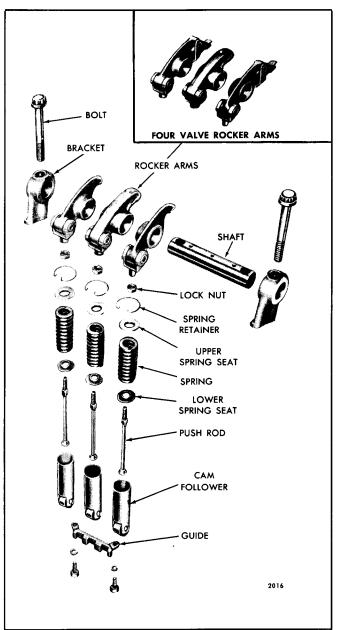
Valve and Injector Operating Mechanism and Relative Location of Parts
